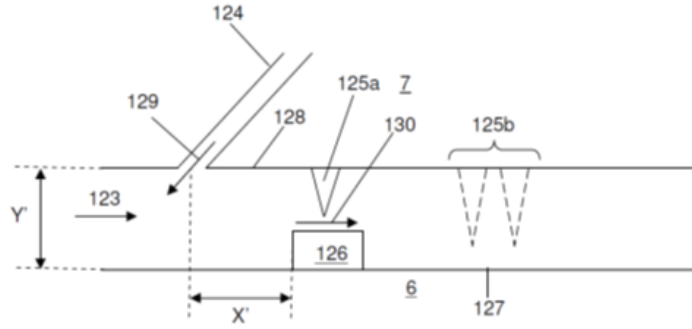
Patent: Seal Assembly, Further Seal Configuration B
